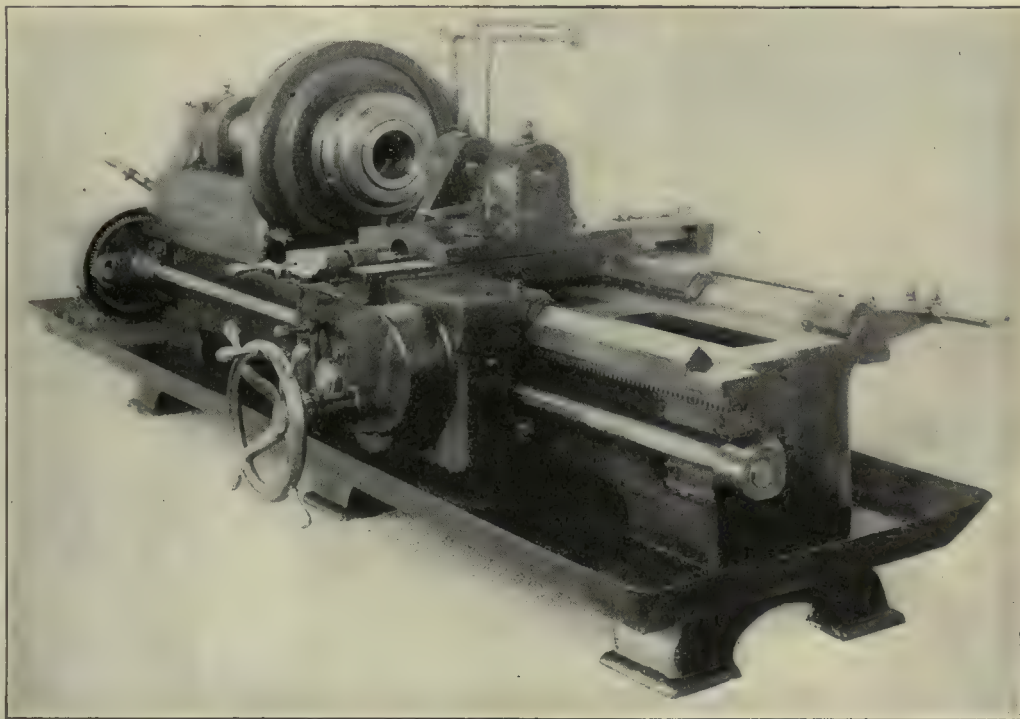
HEADSTOCK OF LATHE SHOWING DRIVE AND FEED MECHANISM
